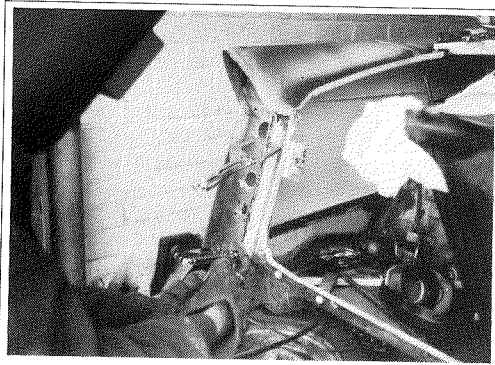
Secure the new assembly with as many clamps as possible and after checking against every reference point noted before hacking the old wing off, welding can begin. Here, up the vertical pillar and along the horizontal seam inside the boot.
